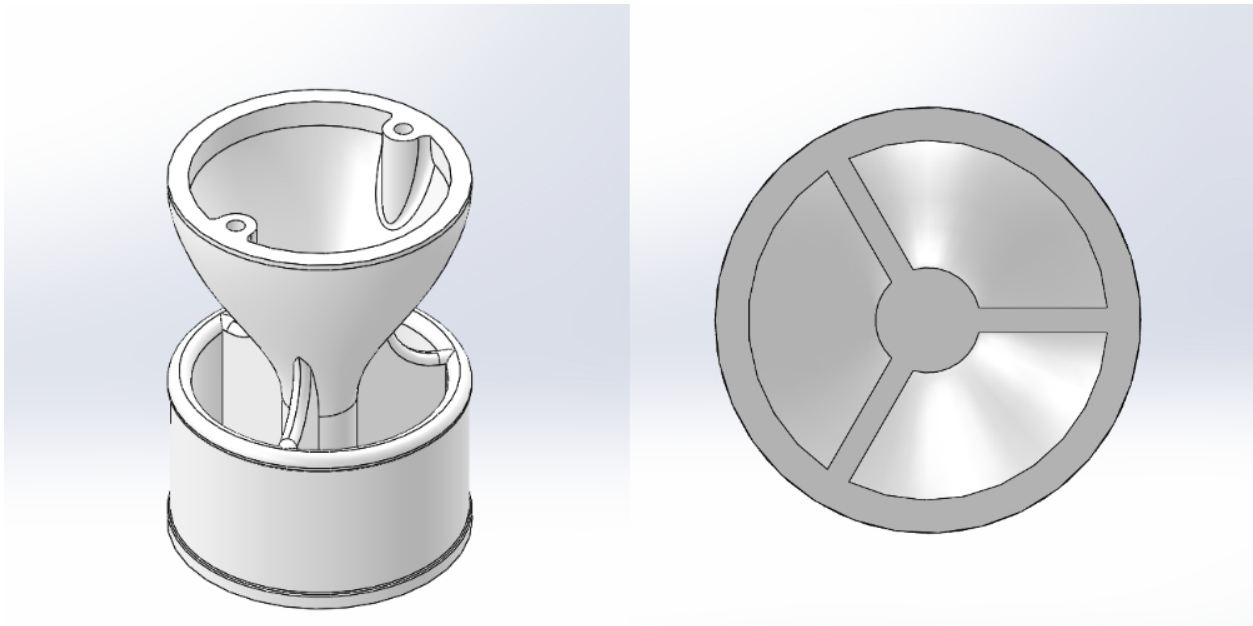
Isometric view (left) and bottom view (right) of the fin assembly.
